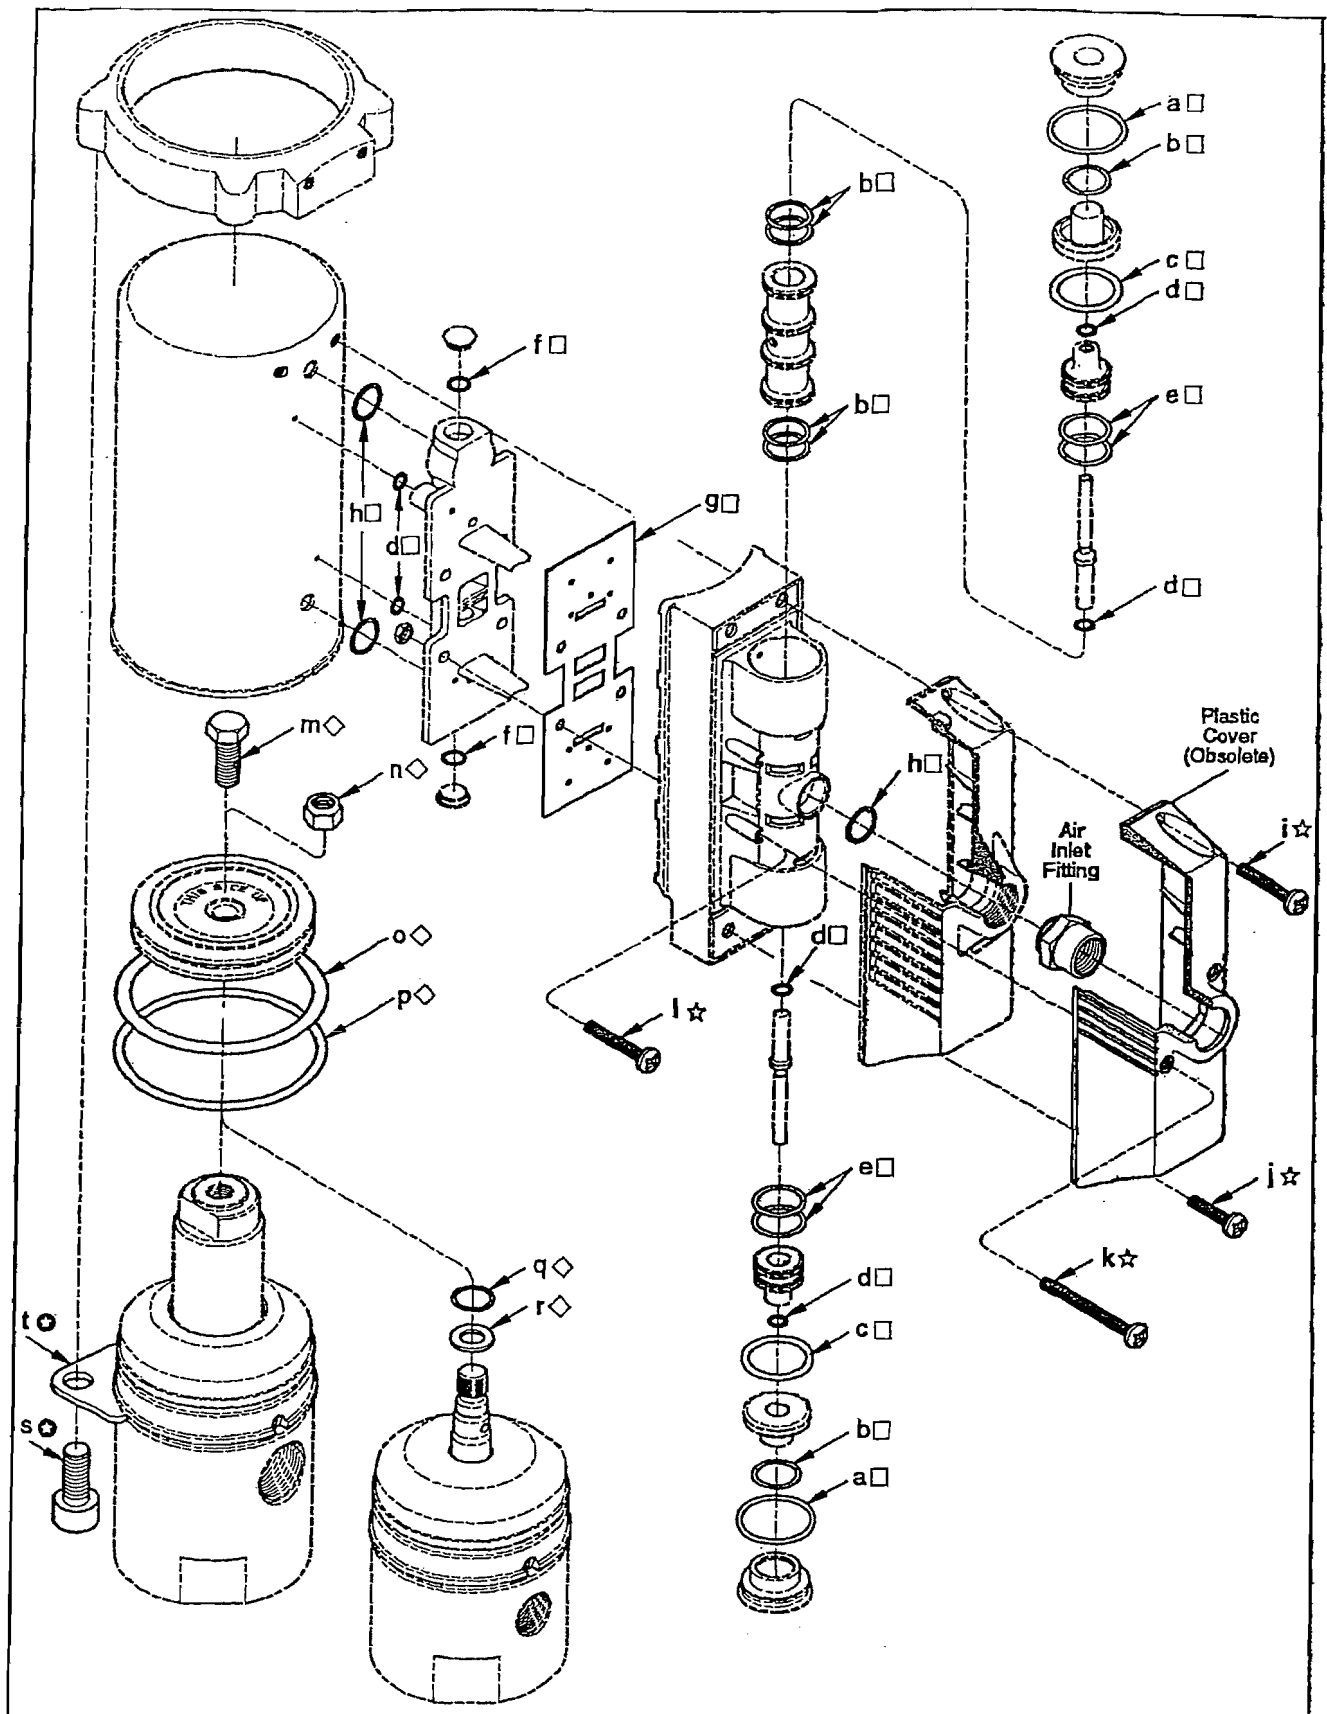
Additional Kits for Air Motor and Pump Tube Assembly
